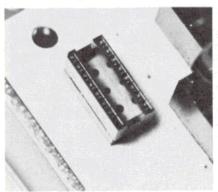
Slide one of the wire wrap sockets into the disembowelled solder-tail socket. Photo 2. Feed the wire-wrap pins through the circuit board and fasten the sockets with fast drying glue.
